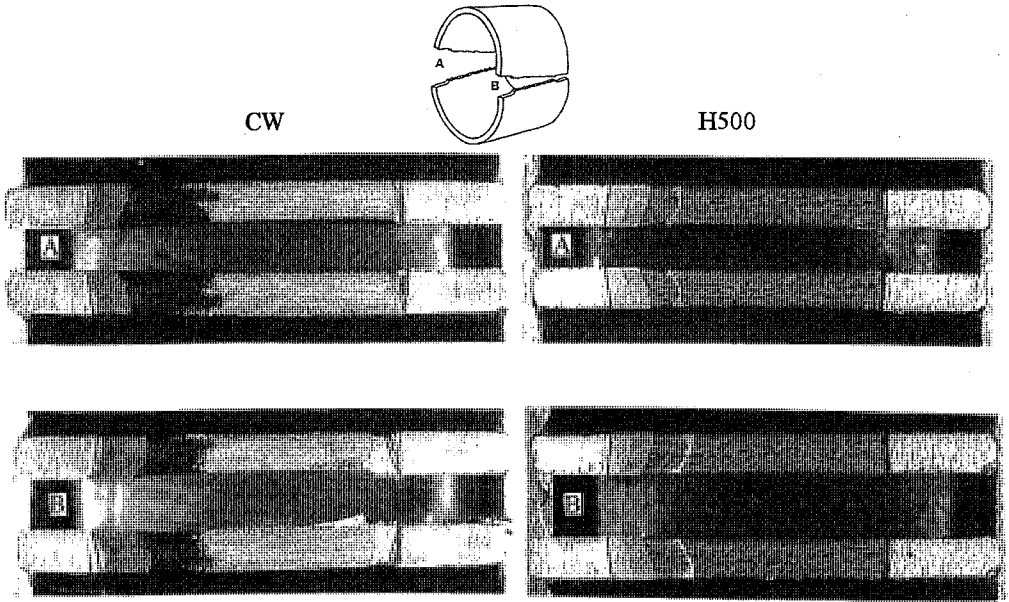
Examples of the fracture surfaces of the specimens after testing: CW specimen (after fatigue pre-cracking, PL-testing, and oxidising) and hydrided specimen, H500 (after fatigue pre-cracking with two different regimes, PL-testing, and short term fatigue).
